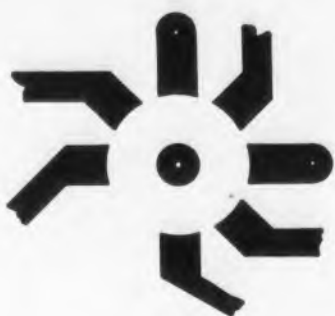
A typical conductor pattern for a socket of the molded type designed for printed circuits.
